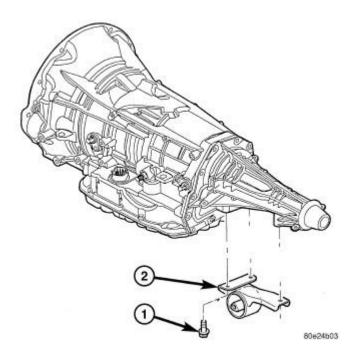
Automatic Transmission Mount Assembly - 2WD Courtesy of CHRYSLER LLC
